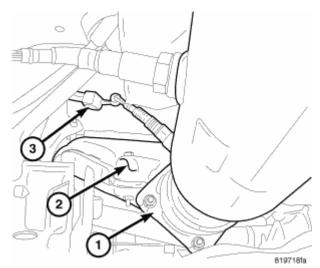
CAT AT EXHAUST MANIFOLD Courtesy of CHRYSLER LLC
